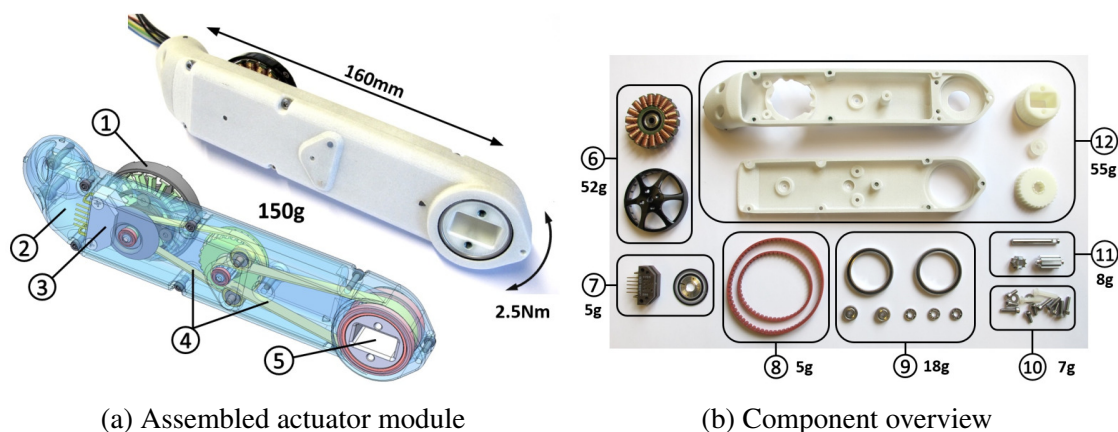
Brushless actuator module (a) assembled, and (b) individual parts. Brushless DC motor ①, two-part 3D printed shell structure ②, high resolution encoder ③, timing belts ④, and output shaft ⑤. Brushless motor ⑥, optical encoder ⑦, timing belts ⑧, bearings ⑨, fasteners ⑩, machined parts ⑪ and 3D printed parts ⑫. Figures extracted from [Gri+20].
